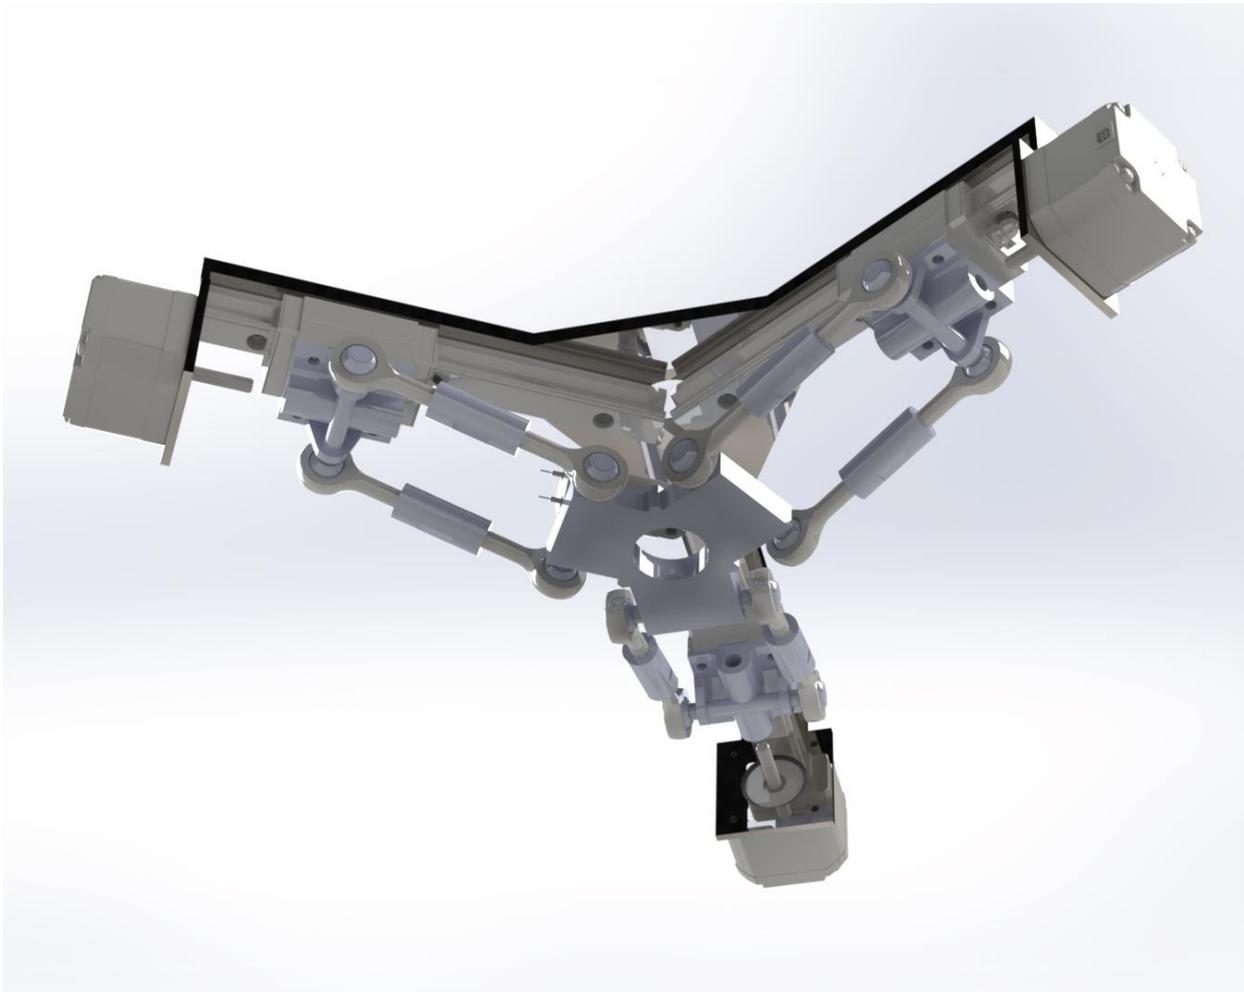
The Dispenser assembly, based on delta 3D printer design.
